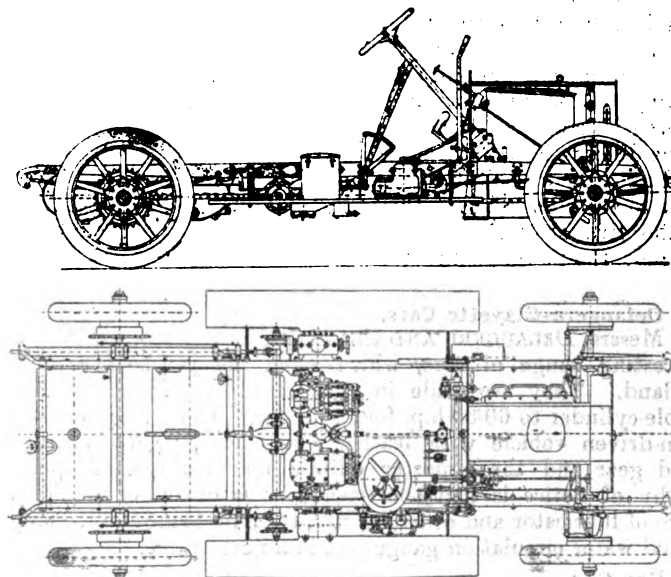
Elevation and Plan of Weyher-Richemond Steam Car.
